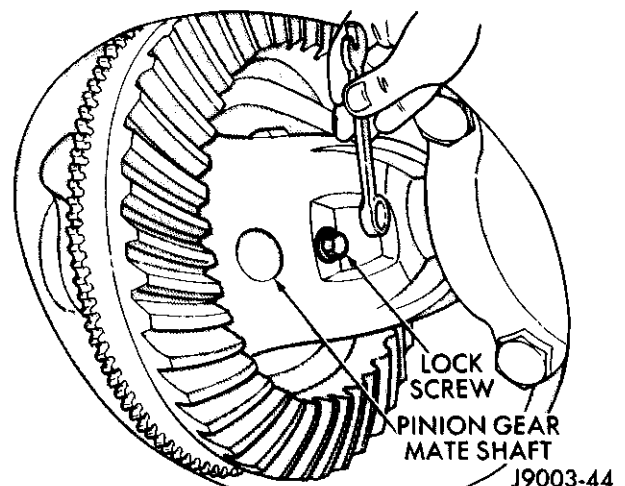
Pinion Gear Mate Shaft Lock Screw
